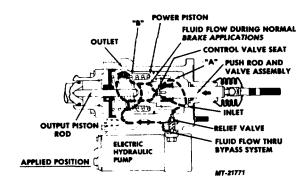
Hydraulic Fluid Flow During Brake Pedal Application.
